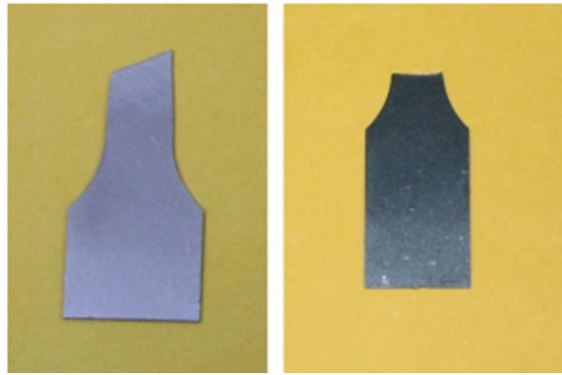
Thin plate fracture shape after (a) tensile (b) fatigue.
